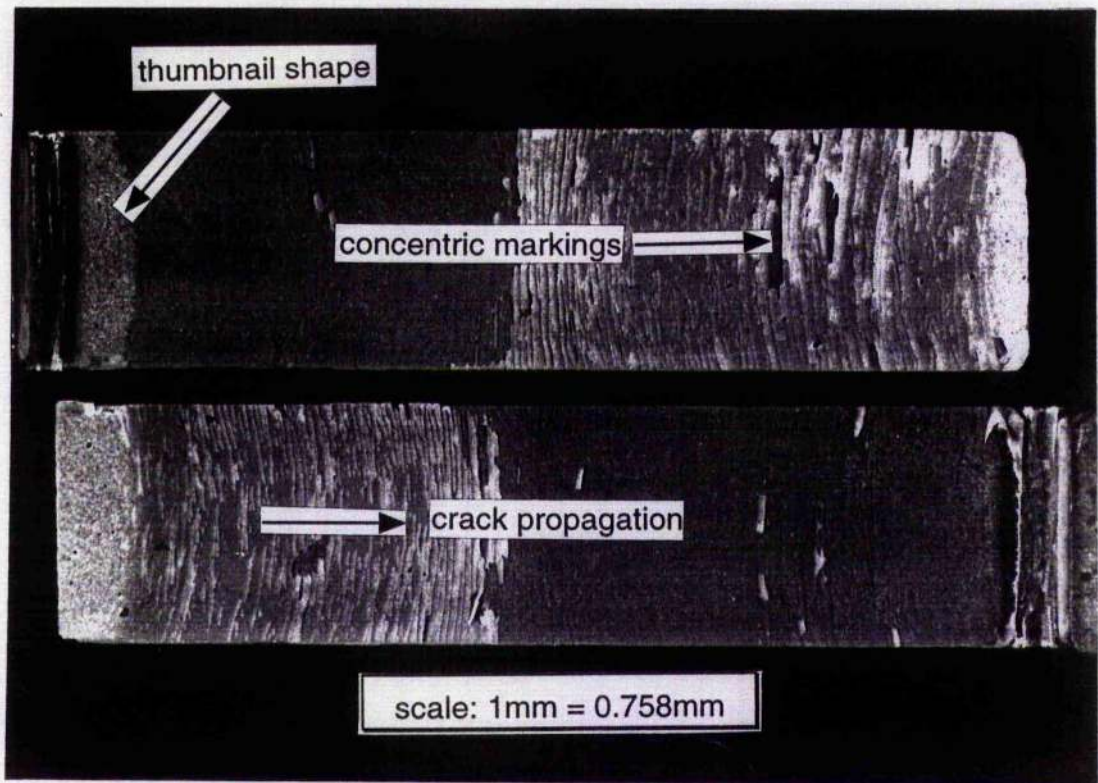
Typical failure surface of a 100mm overlap Araldite 2007 bonded steel lap shear joint
